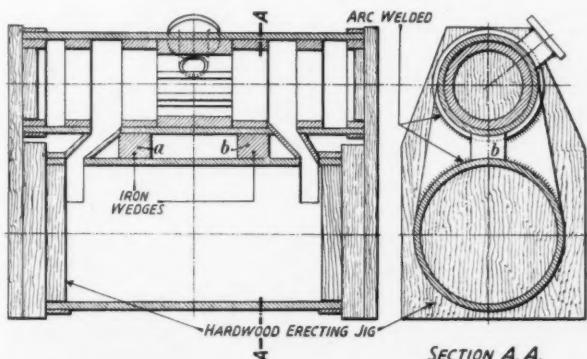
Cylinder and steamchest mounted in assembly jig, ready for the attachment of the steam connections
